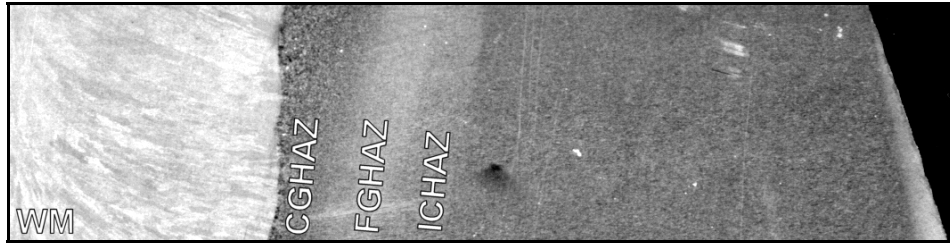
Weld Coupon “II” Cross-Section (5.5x magnification)
